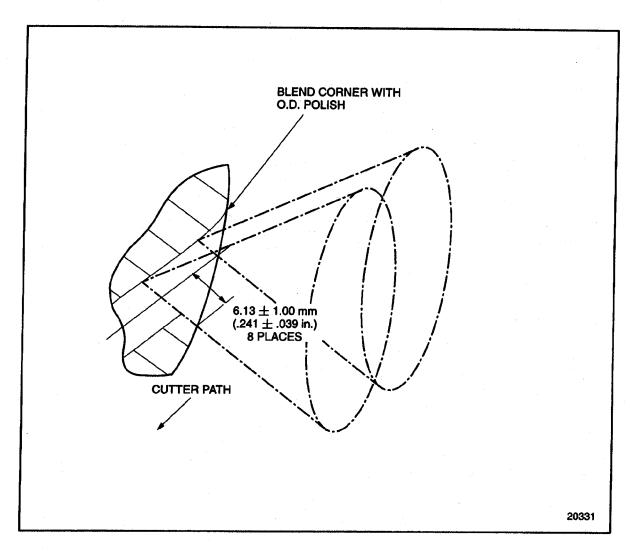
Connecting Rod Journal Oil Hole Chamfer Limits
